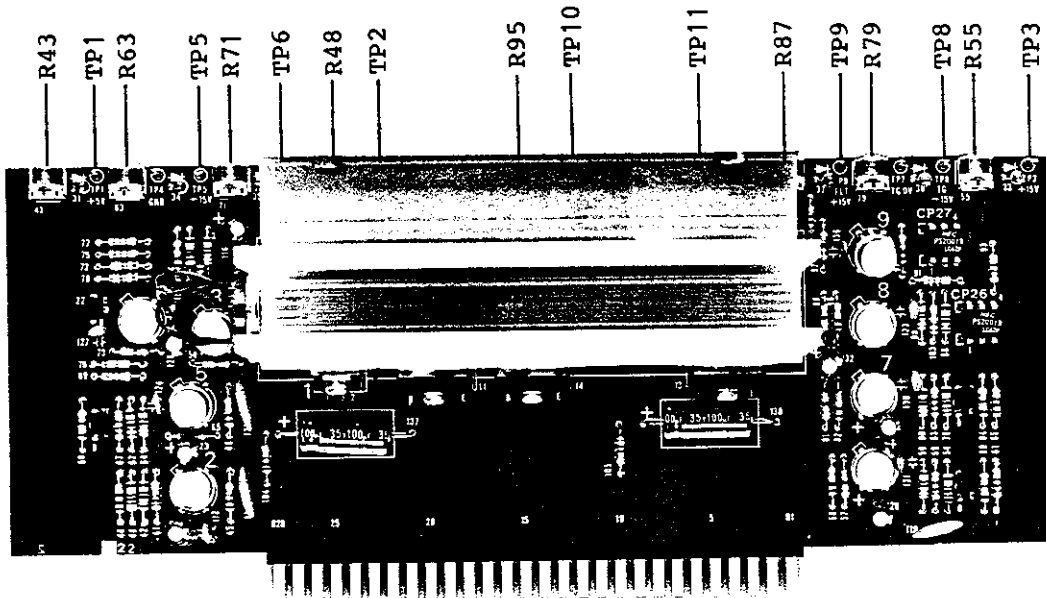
Adjustment locations of power control board (BGF-011218)
